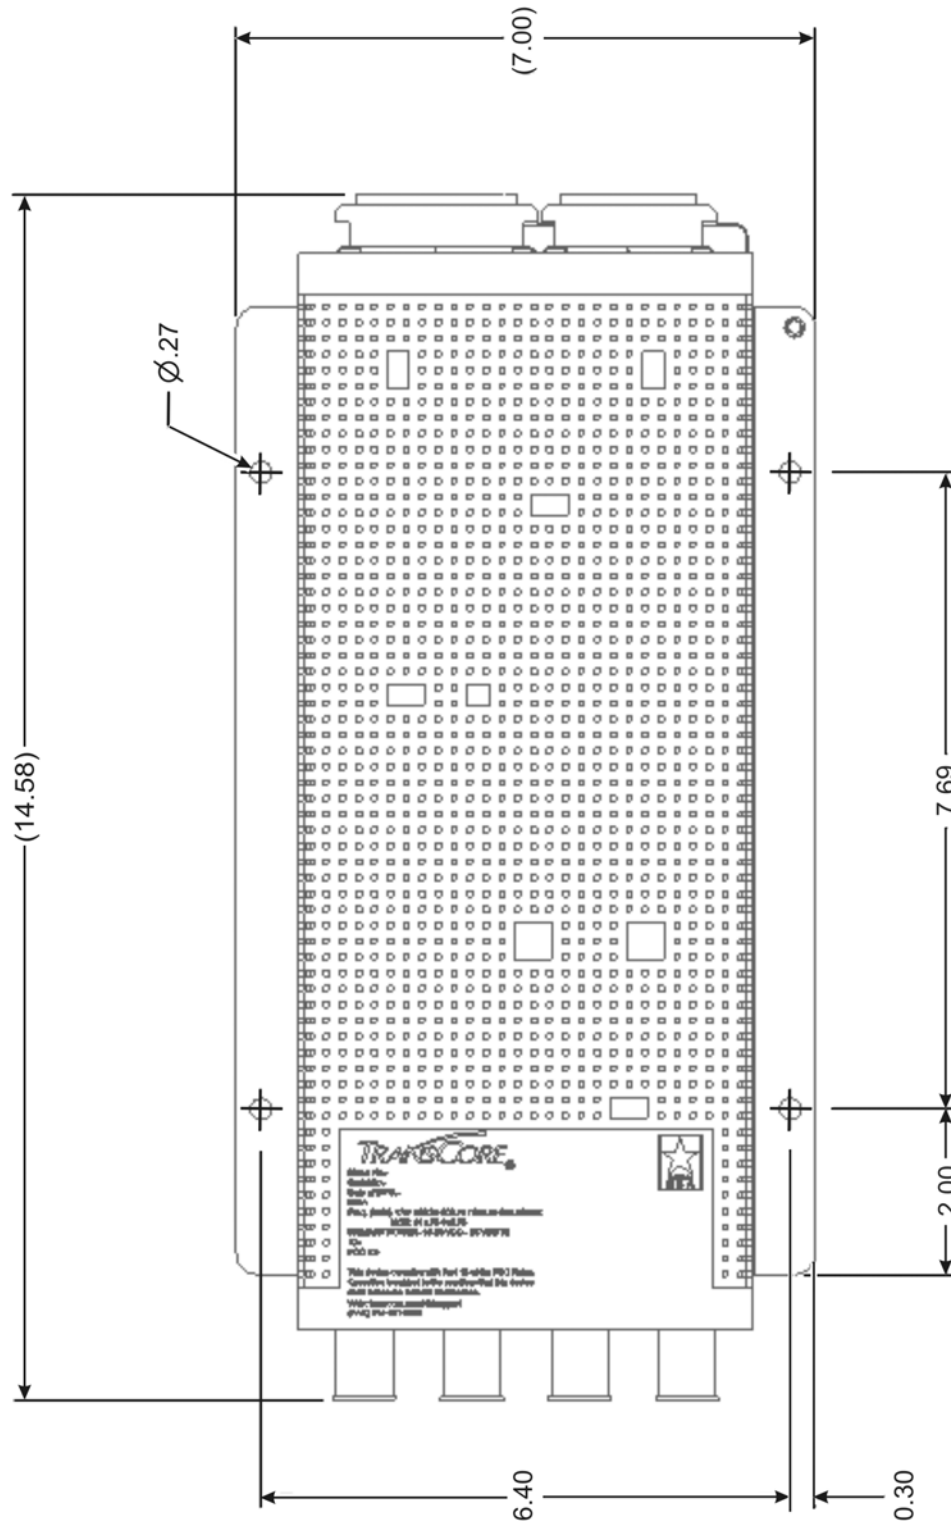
MPRR Outer Dimensions and Mounting Hole Locations in Inches (not to scale)
